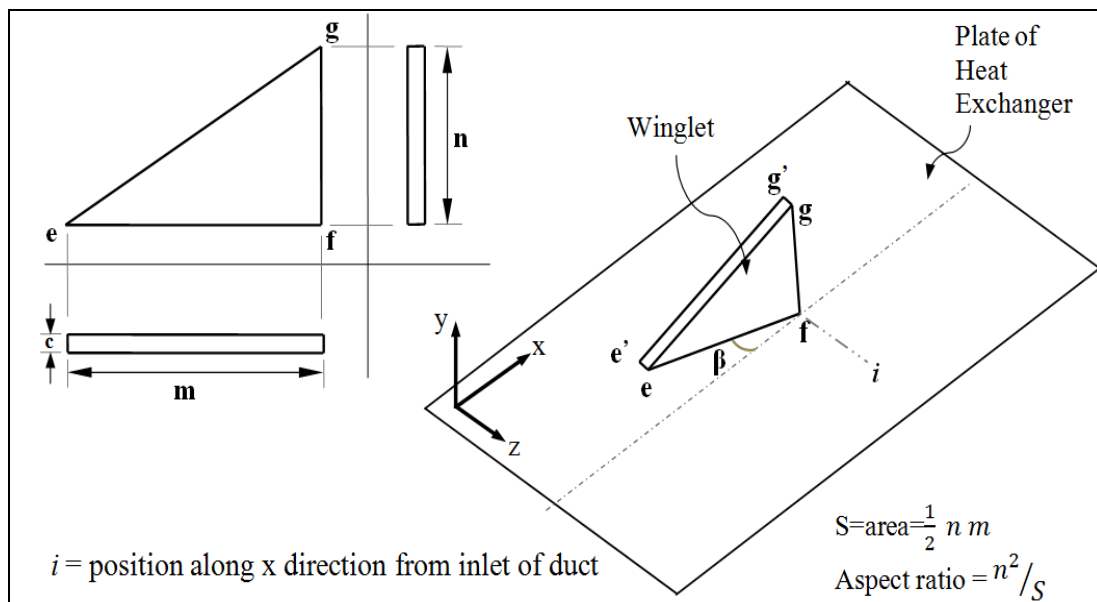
Two dimensional view of finite thickness winglet mounted on the plate
